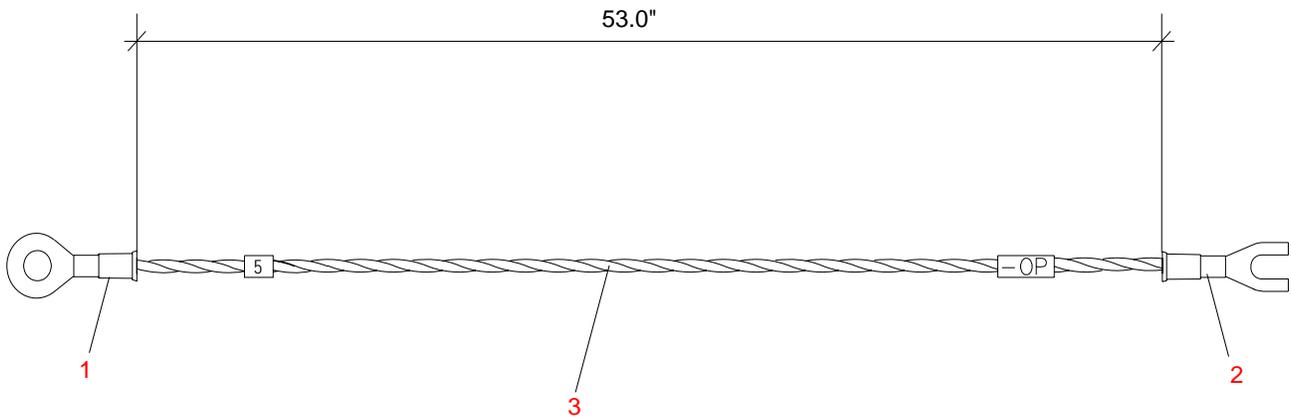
Negative Wire - Driver Board 5 Cable Assembly
